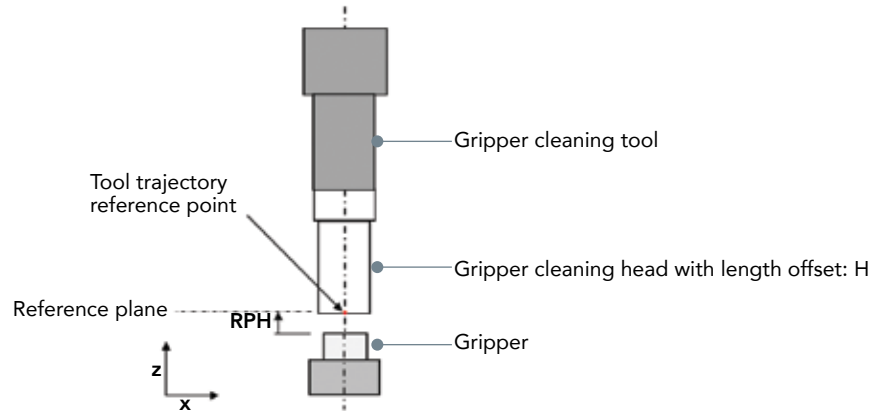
Use of a table mounted tool pre-setter to obtain gripper cleaning tool assembly length
